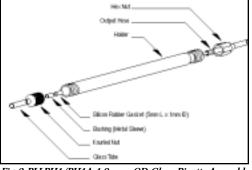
PLI-PH1/PH1A 1.0 mm OD Glass Pipette Assembly
